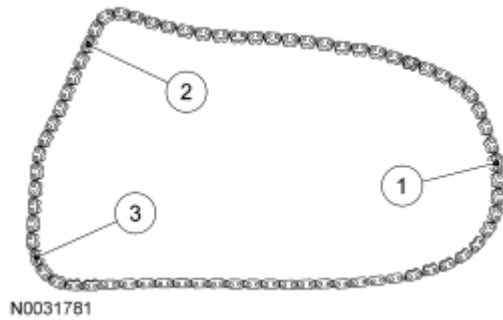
Locating Crankshaft & Camshaft Timing Marks On LH & RH Timing Chains
